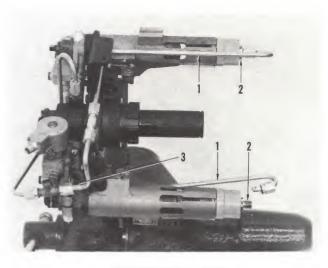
Preparation for Ramming Mechanism Disassembly
